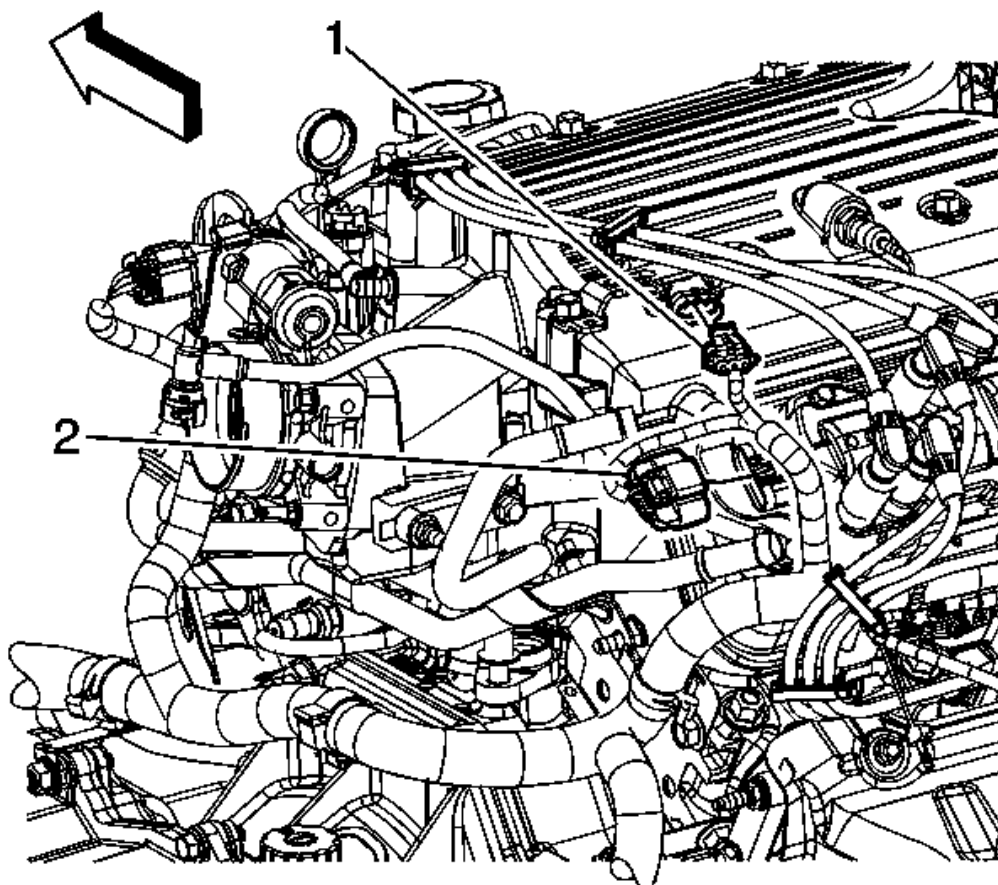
Identifying Engine Wiring Harness Electrical Connector
